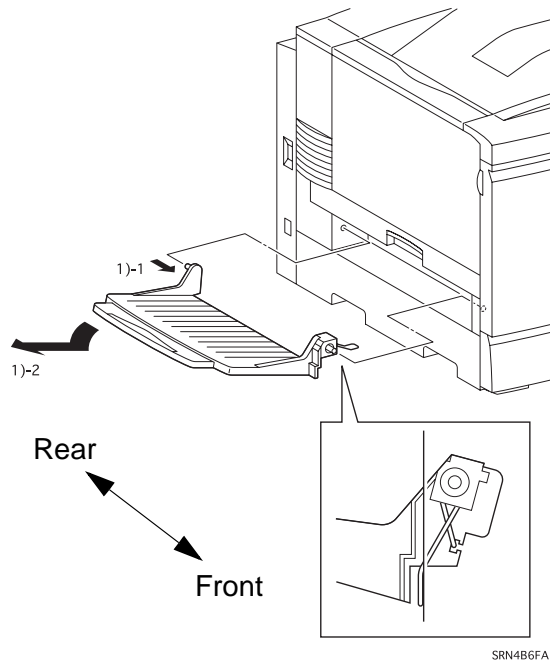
EXIT TRAY ASSEMBLY Removal (PL10.1.10)
